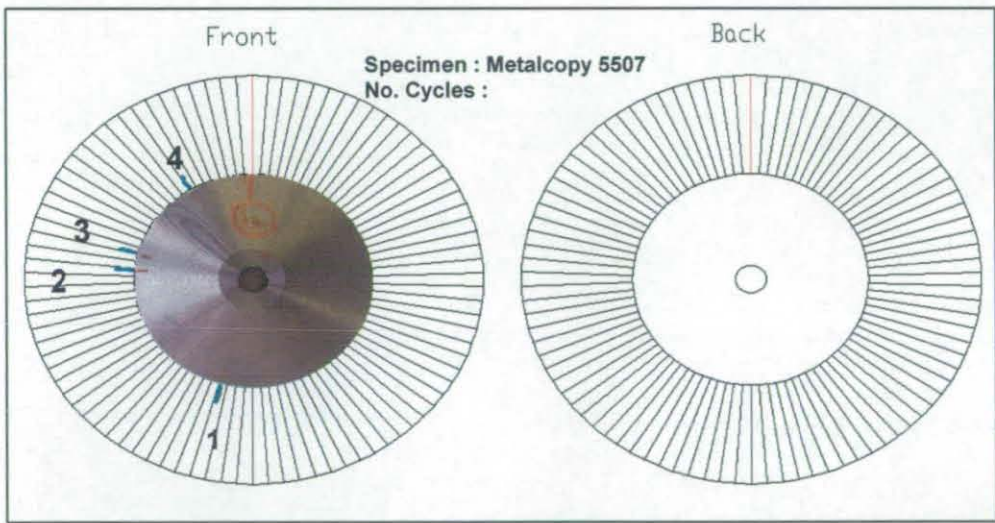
2 Example of crack log sheet with specimen in position with cracks 1 - 4 identified
